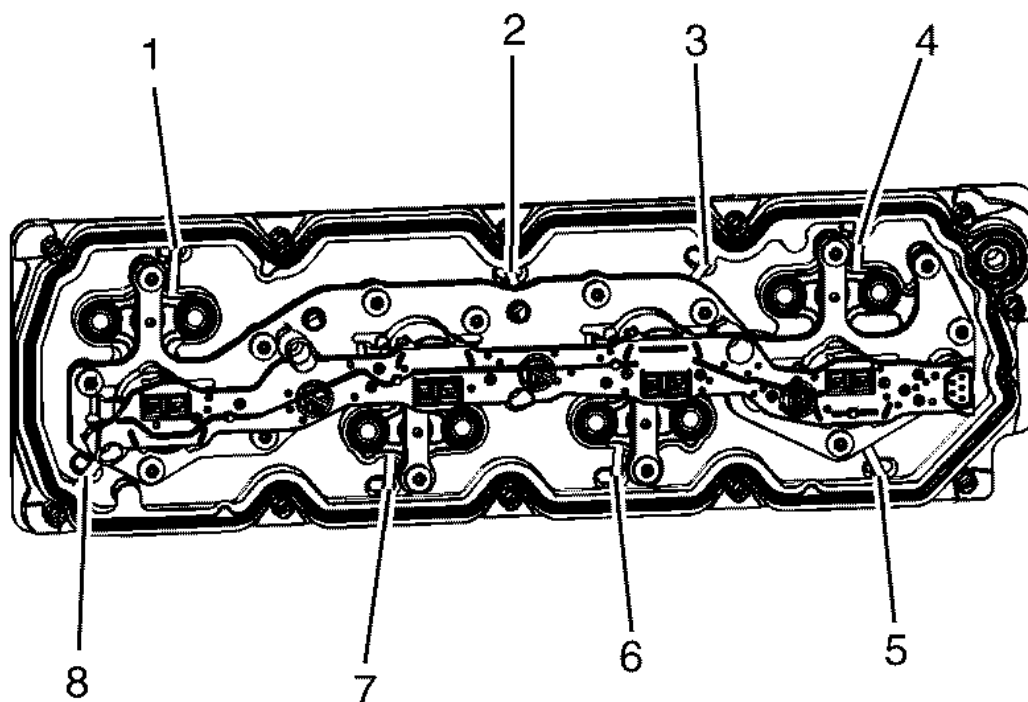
Identifying VLOM Outer Gasket Retaining Strap Locations
